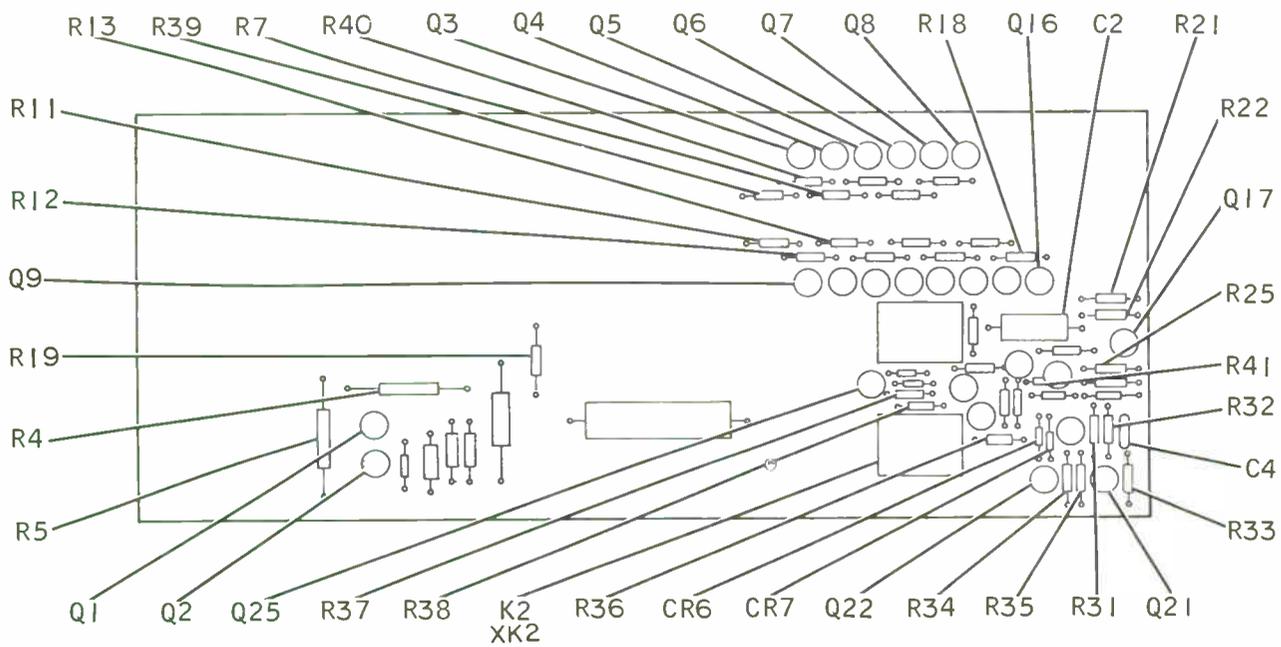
Lampdriver Board (Sheet 2 of 2).
